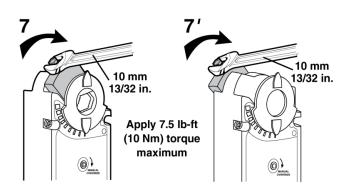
Fasten the Shaft Adapter to the Shaft.
